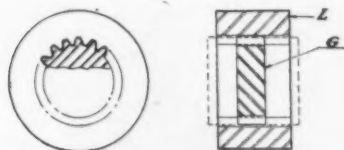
Internal lapping. The work gear is reciprocated inside the special lap, contacting first one side and then the other of its teeth.
